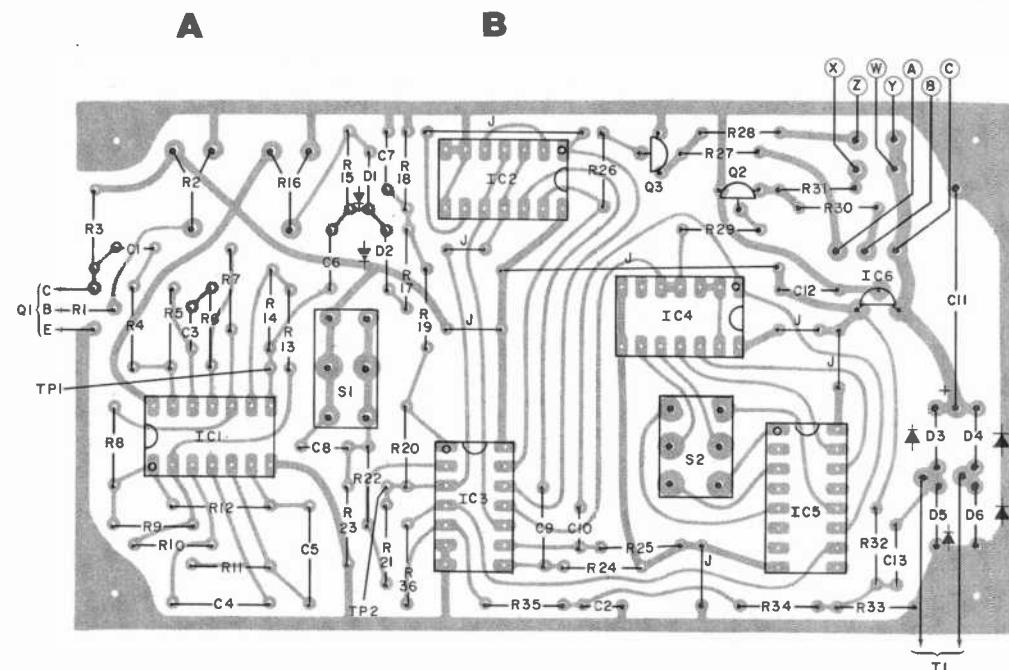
Parts placement guide for the AD*ZAP infrared receiver printed circuit board.
